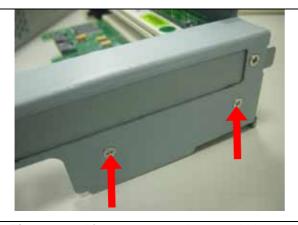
After move out riser card kit, loosen two crews then move out the add-on card.
